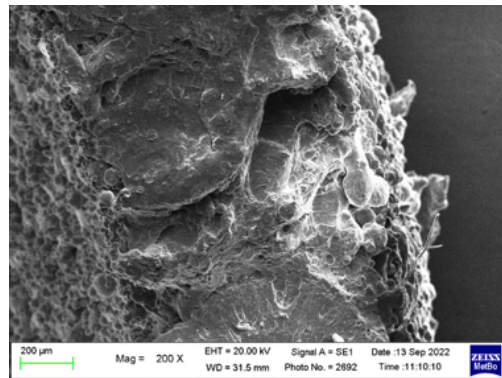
Defect extending through the entire thickness of a 1.2 mm thick specimen.
